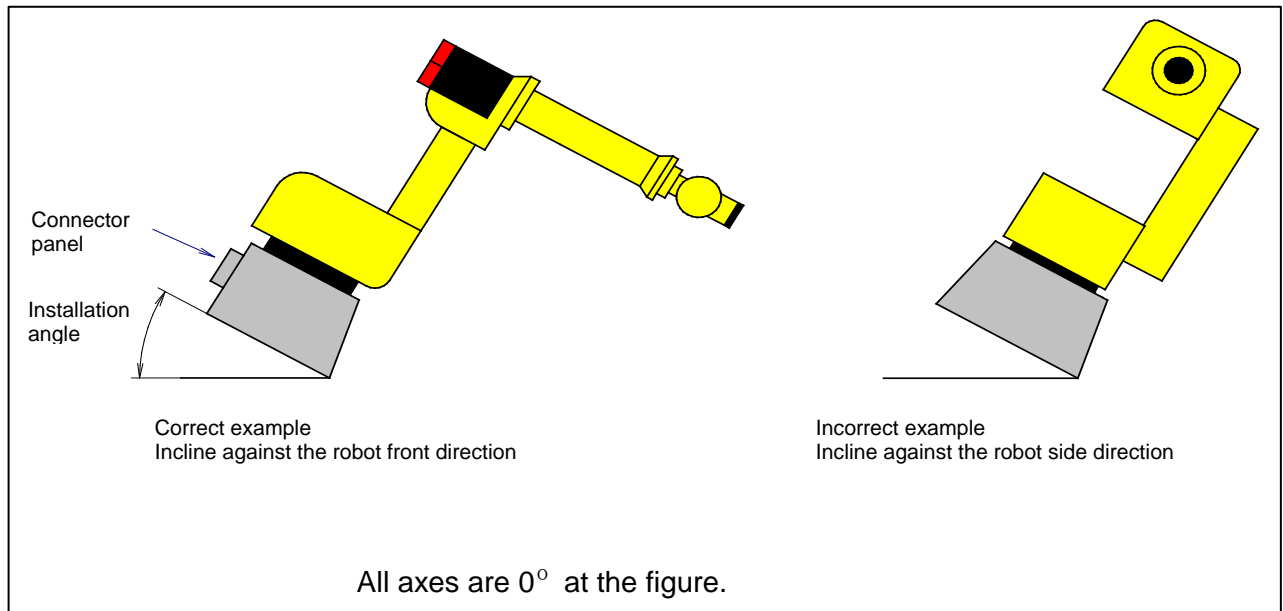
(a) Direction of robot wall mount and inclination installation
